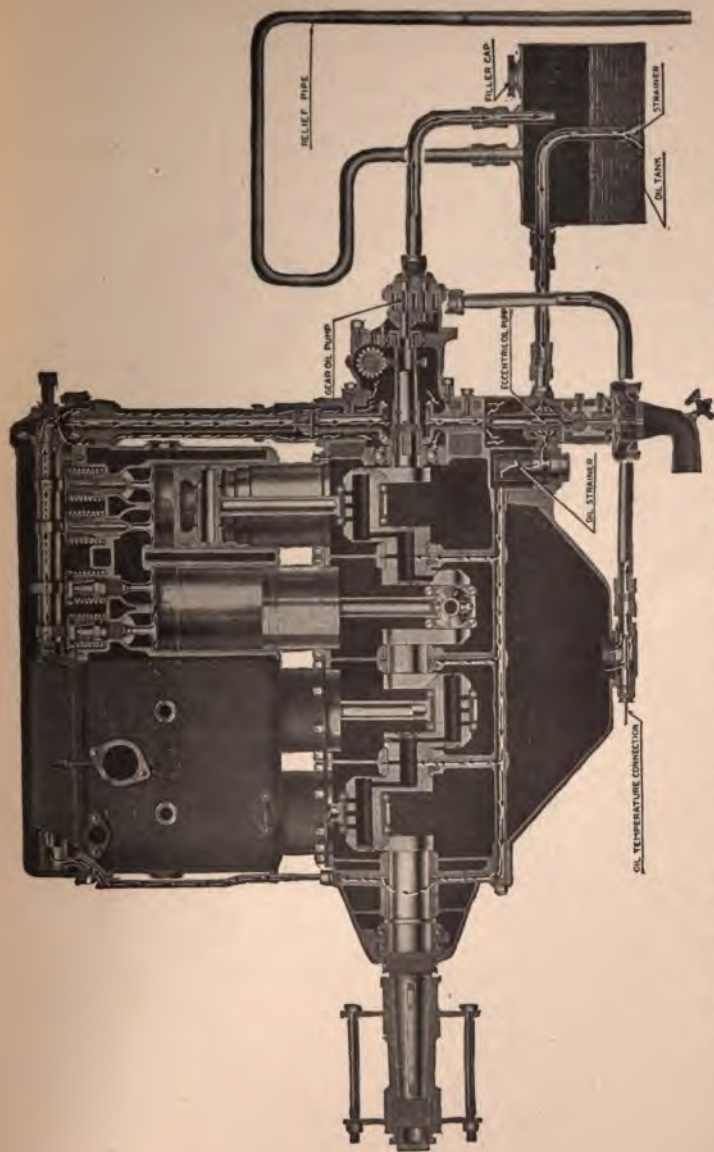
Longitudinal view of Hispano-Suiza, Model E, engine, showing construction
